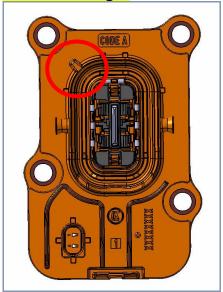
Tab header KHV 600 1way Code A to receptacle housing
